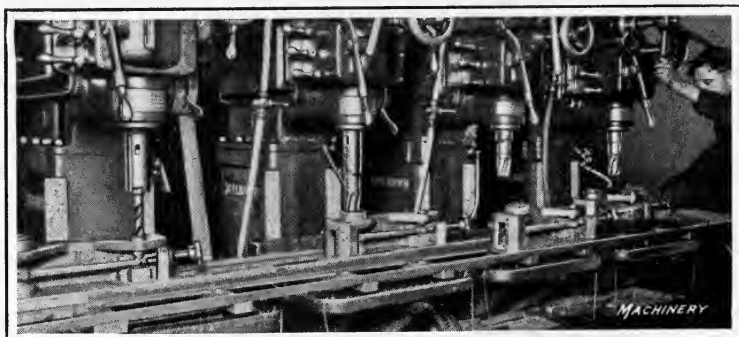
Gang of Four High-duty Drilling Machines equipped with Sliding Jigs for Drilling Connecting-rods. One Spindle is held in Reserve to Substitute as required
